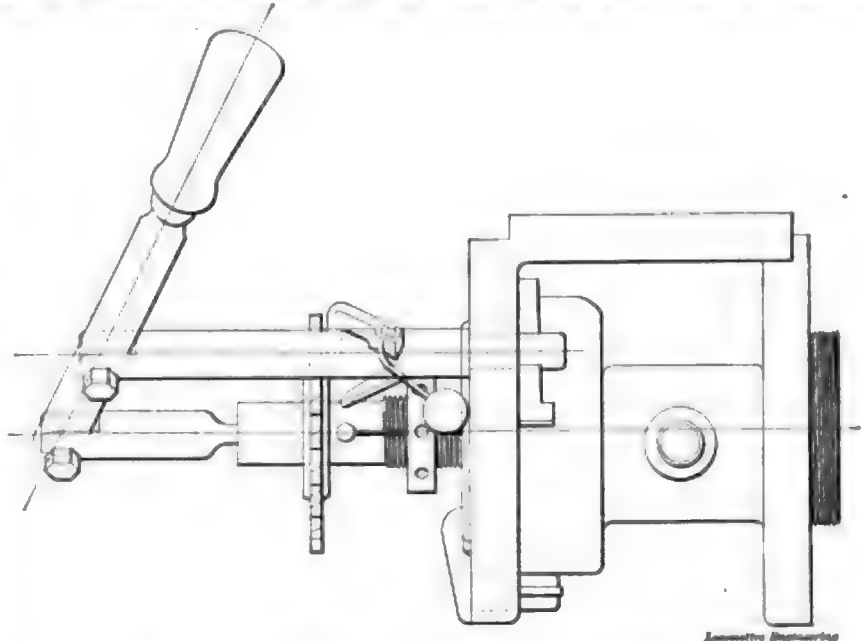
SIDE VIEW OF TRIPLE PISTON RING GRINDING MACHINE.
